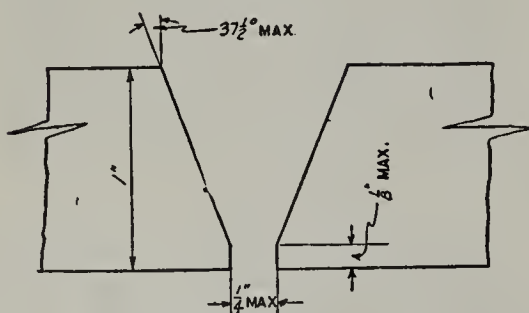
(b)—Alternate Butt Joint for Plate 1 In. Thick (May be Used for the Oxyacetylene Process Only)
